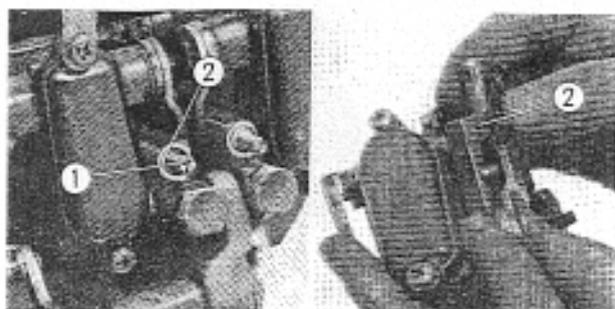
① Adjusting screw ② Adjuster holder
